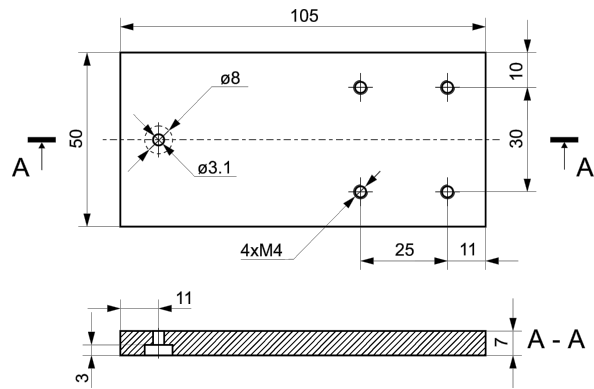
The drawing of the fixing part. The material is oxygen-free copper.
